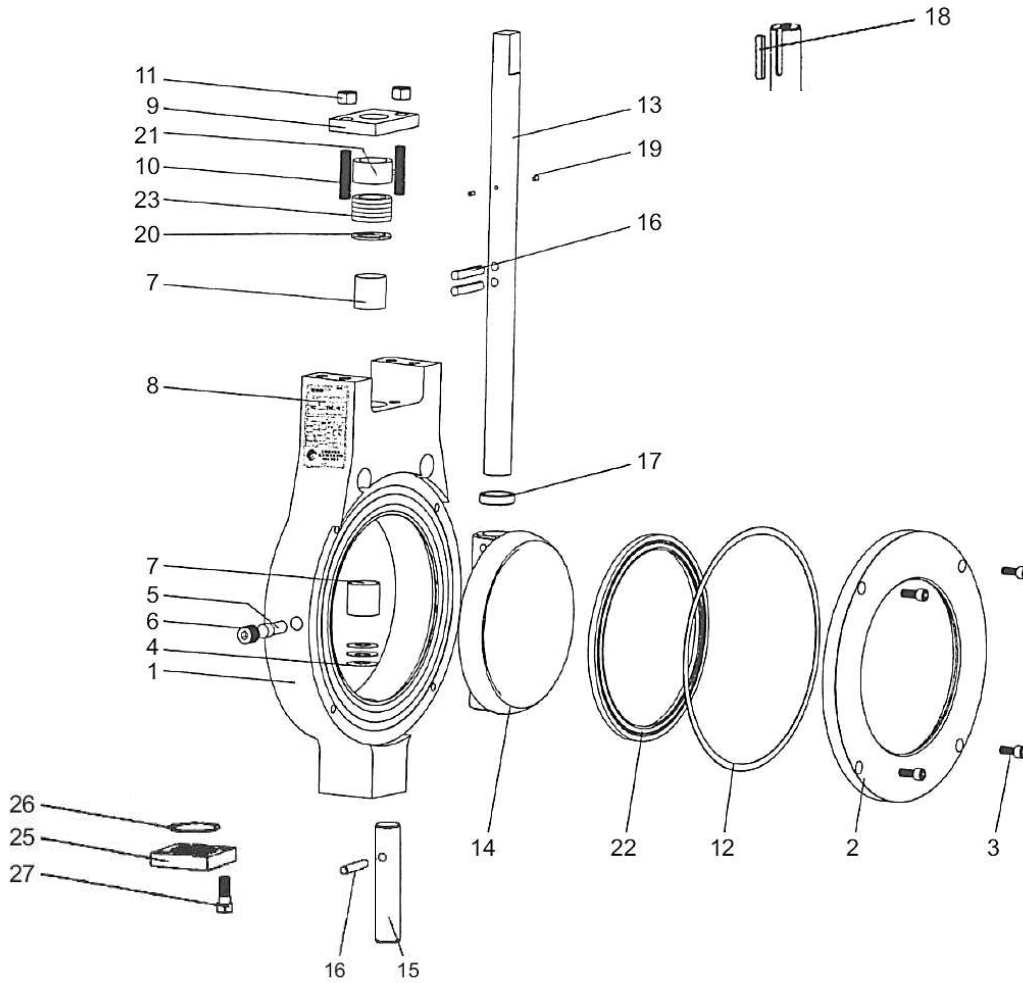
Cameron Valves WKM 4" -12" Class 600 DynaCentric Butterfly Valve Components Wafer Style
